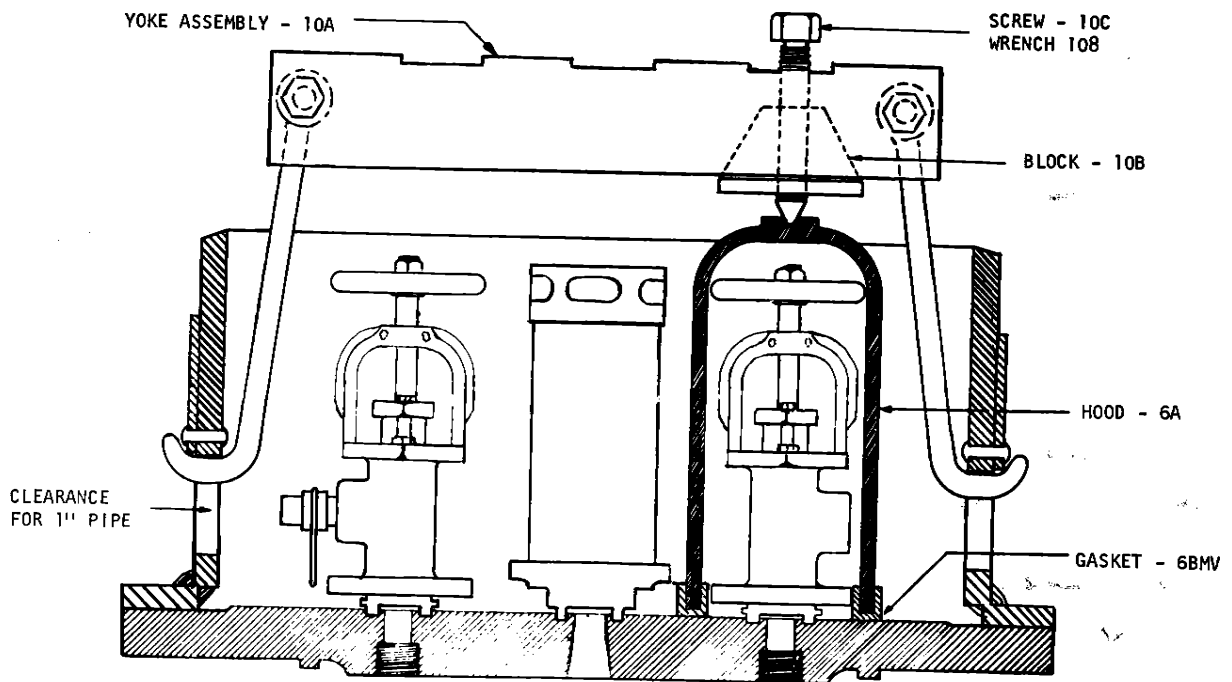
DEVICE 6-OVER ANGLE VALVE
